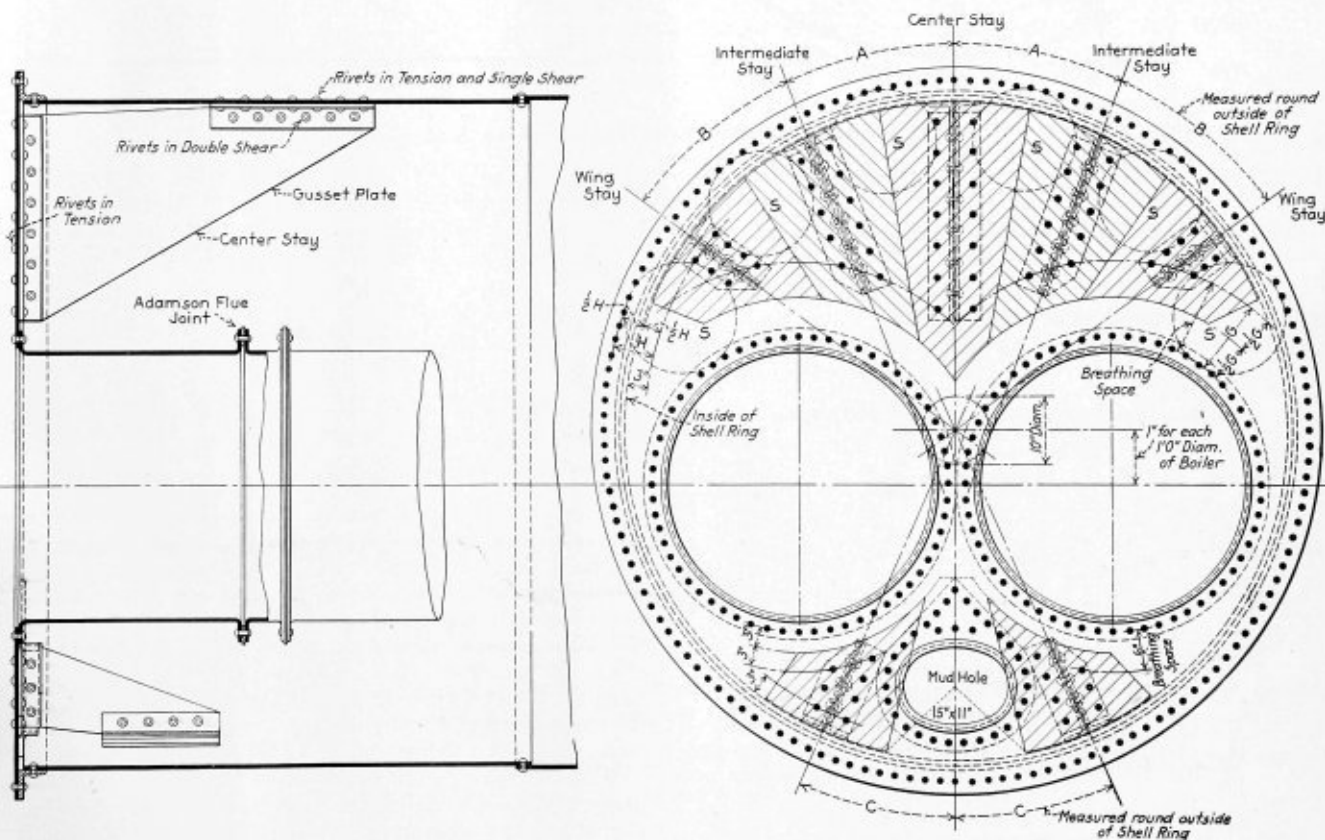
Arrangement of Setting Out Front End for Design of Gusset Stays
